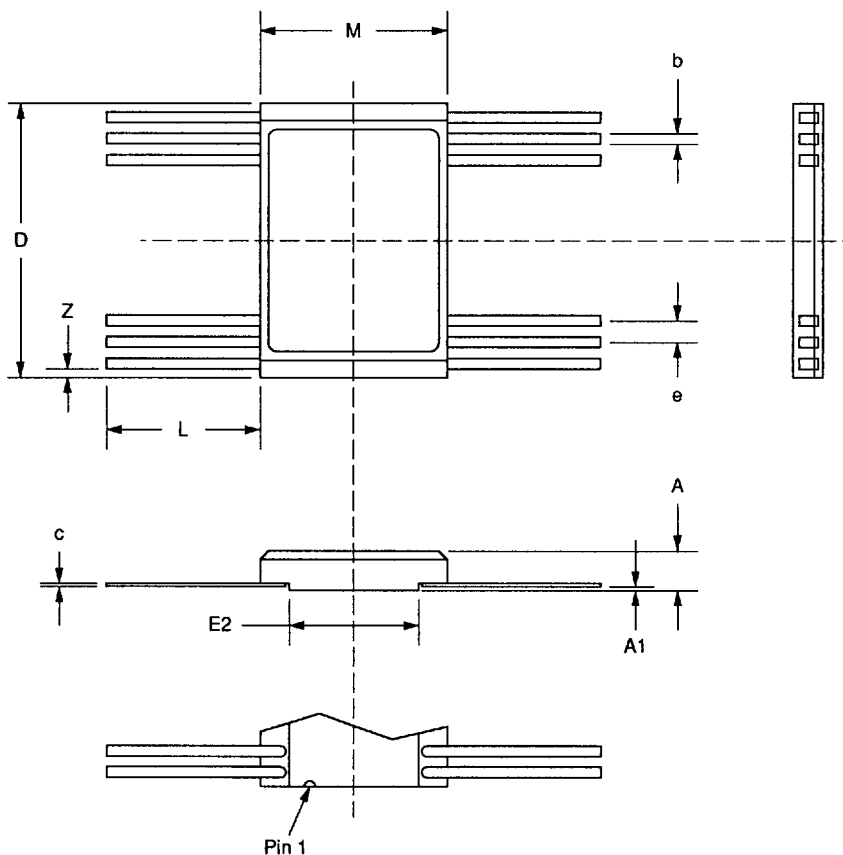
16-Lead Bottom Braze Flatpack (Solder Seal) - Package Style F
